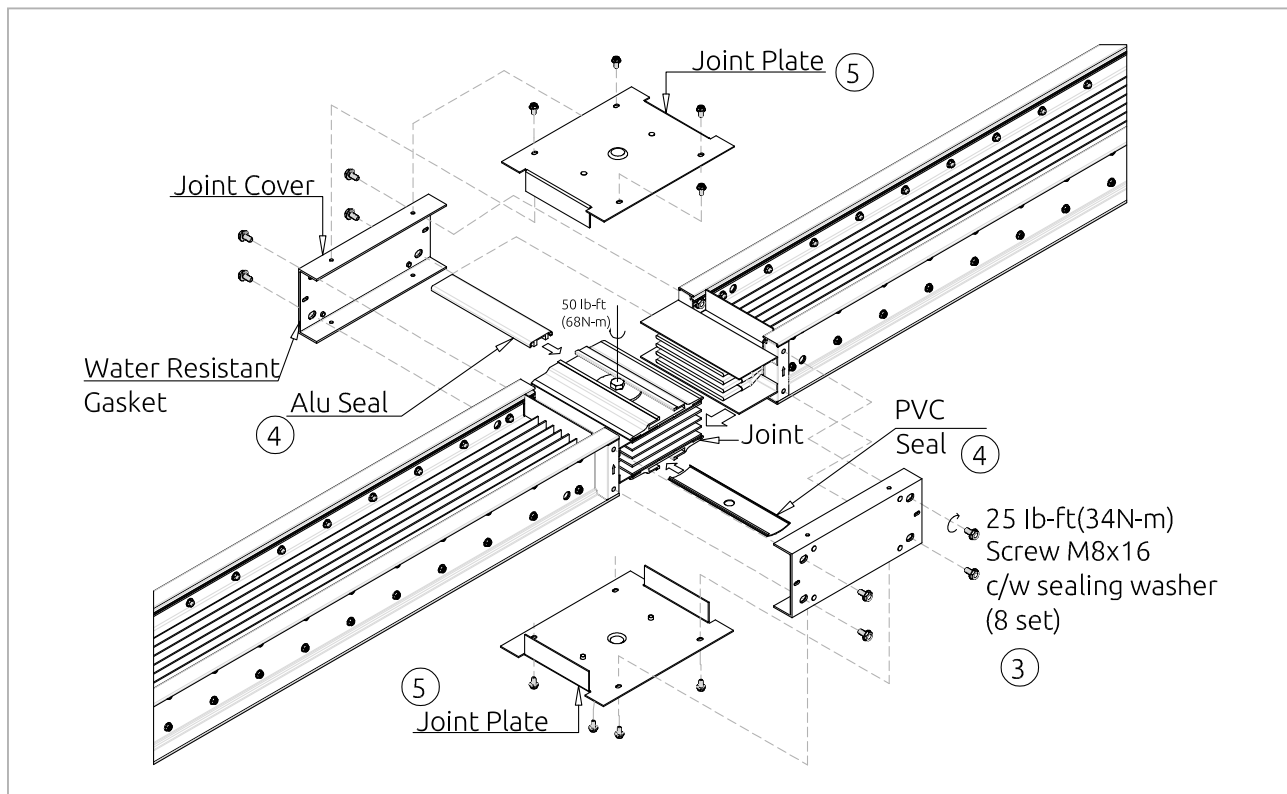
Assembly of outdoor busway joint. Correct way to assembly of joint shields is illustrated.
